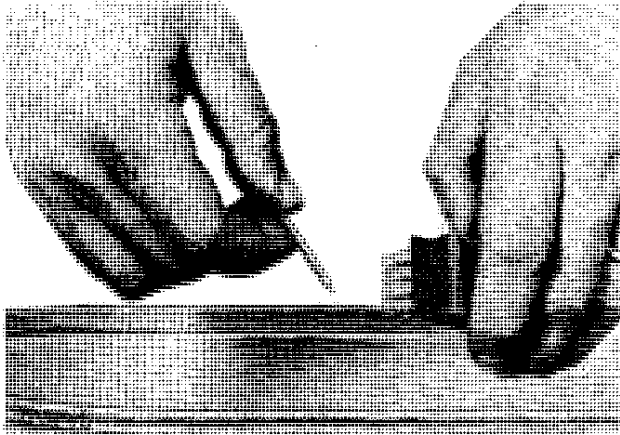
Cleaning Nozzle Valve Tip with Brass Wire Brush No. 16488
